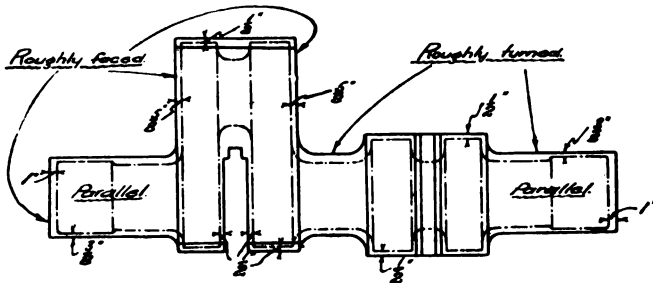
FORGING FOR A LOCOMOTIVE CRANK-AXLE, SHOWING THE AMOUNT OF "CLEANING."
